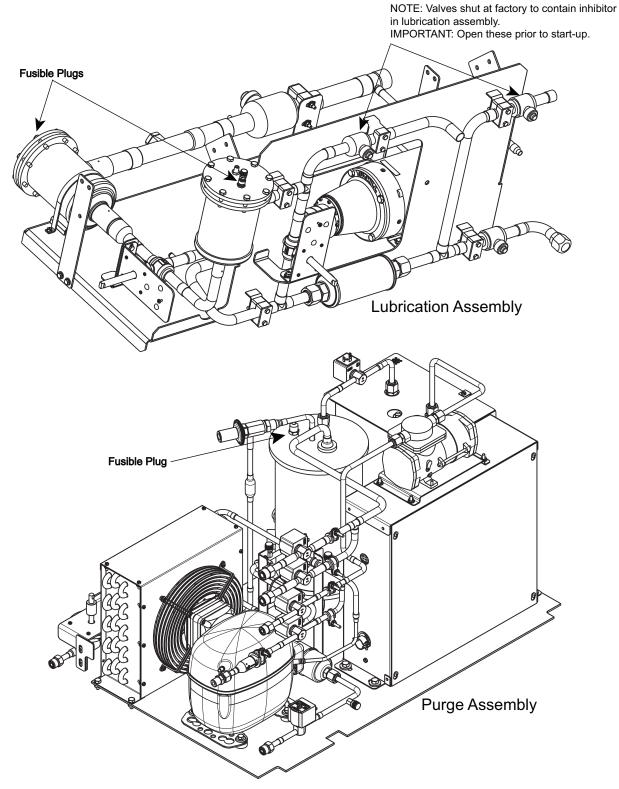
Location of Fusible Plugs in Lubrication Assembly and Purge Assembly
